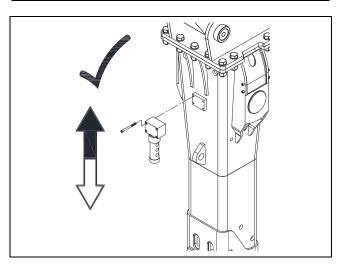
Mount Pump Vertical - Parallel To Housing
